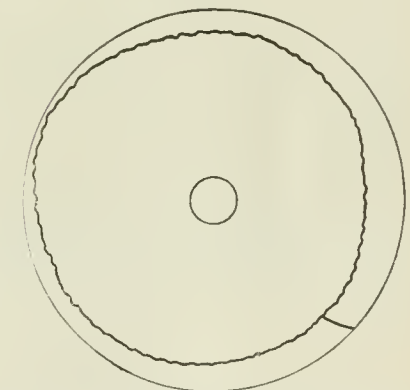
CHART OF A 72-TOOTH HOBBED GEAR RUNNING WITH A 24-TOOTH PINION, THE TEETH OF THE LATTER HAVING BEEN CORRECTED TO TRUE INVOLUTE FORM BY GRINDING. CHART SHOWS SOME ECCENTRICITY
